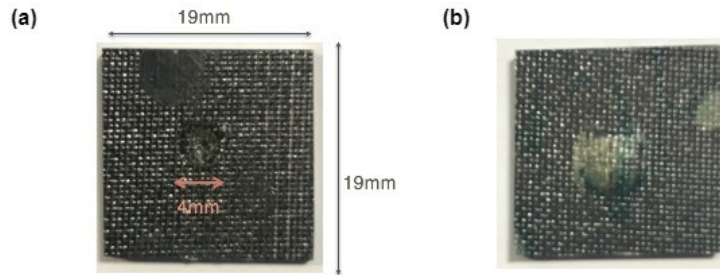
Photograph of specimen: (a) impact damage on front surface; (b) protrusion on back surface.
